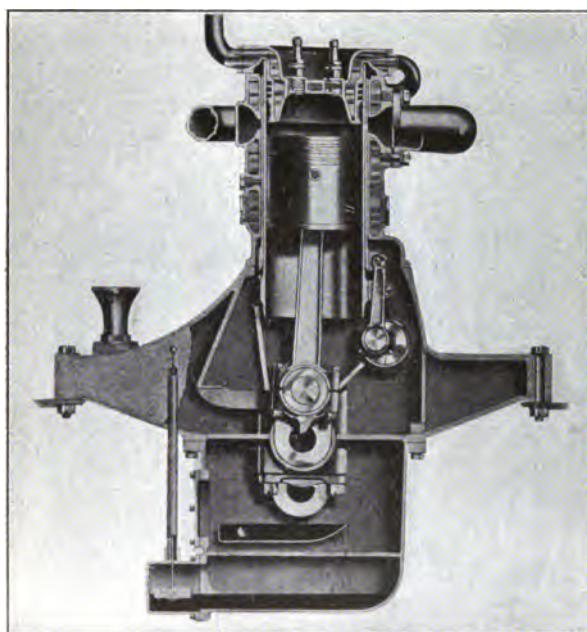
Columbia Knight Motor, Cross-Section View.
